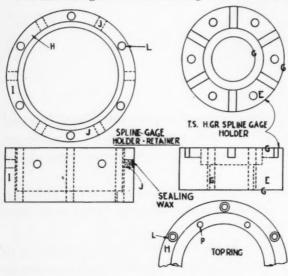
Drawing showing design of spline gage holder and its retainer.
